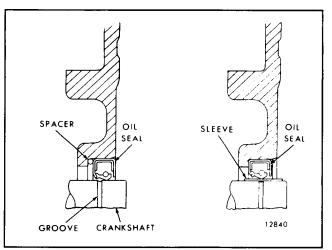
Use of Rear Oil Seal Spacer or Sleeve on Grooved Crankshaft (8V-53 Engines)
